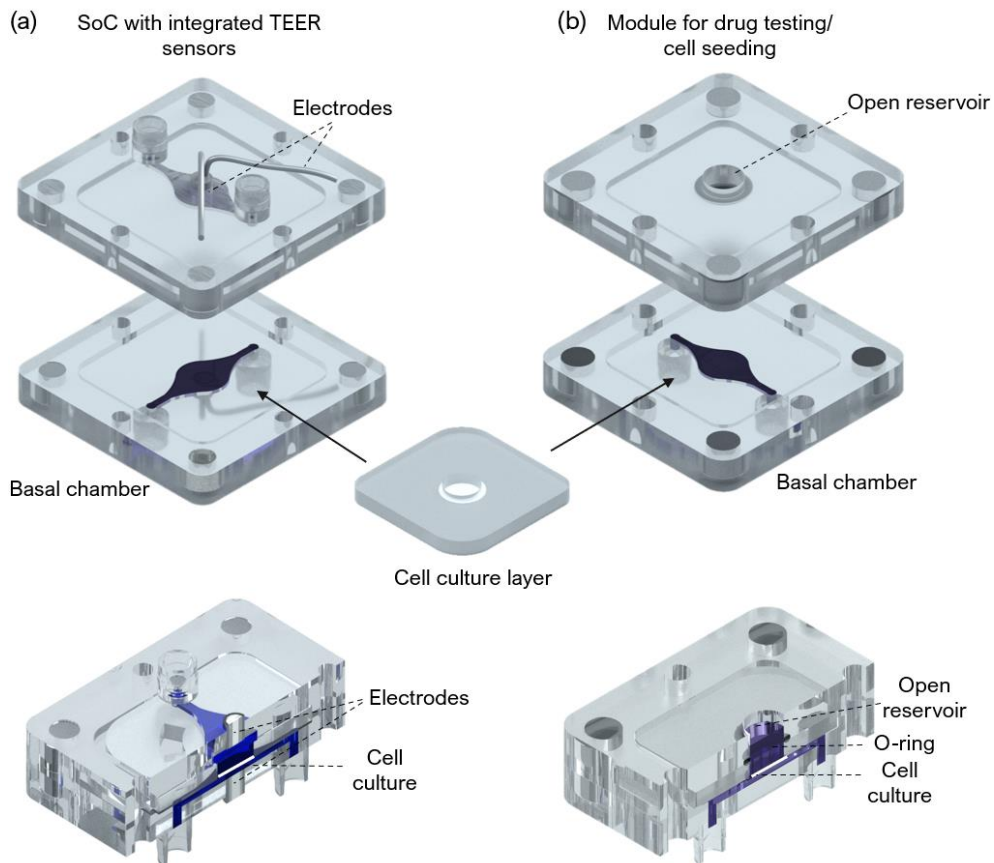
2. Schematic design including an exploded view (top) and cut (bottom) of the (a) SoC device with integrated TEER sensors made of Ag/AgCl-sintered pellet electrode, insulating polyether ether ketone (PEEK) tubing and external silver tubing and (b) Module for drug testing/cell seeding with a central open reservoir, integrated O-ring and basal chamber for perfusion. The modular design and reversible sealing allow the modules to be easily exchanged without causing disruption and/or damage to the cell culture layer.
